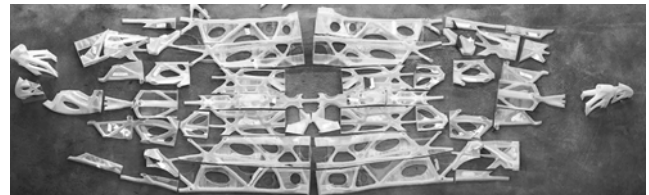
The 84 3D printed pieces before assembly. (Moritz Studer, ETH Zürich, 2017)
